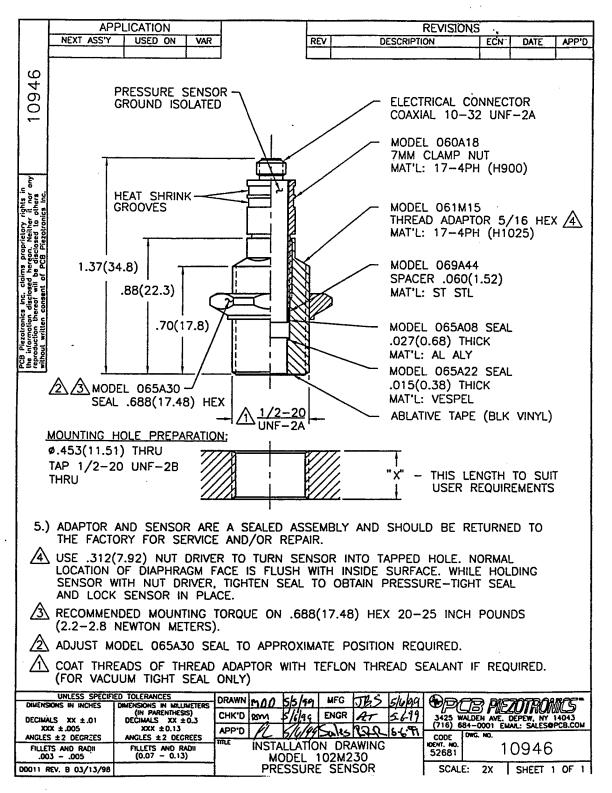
Engineering drawing of PCB 102M230 pressure gauge.
